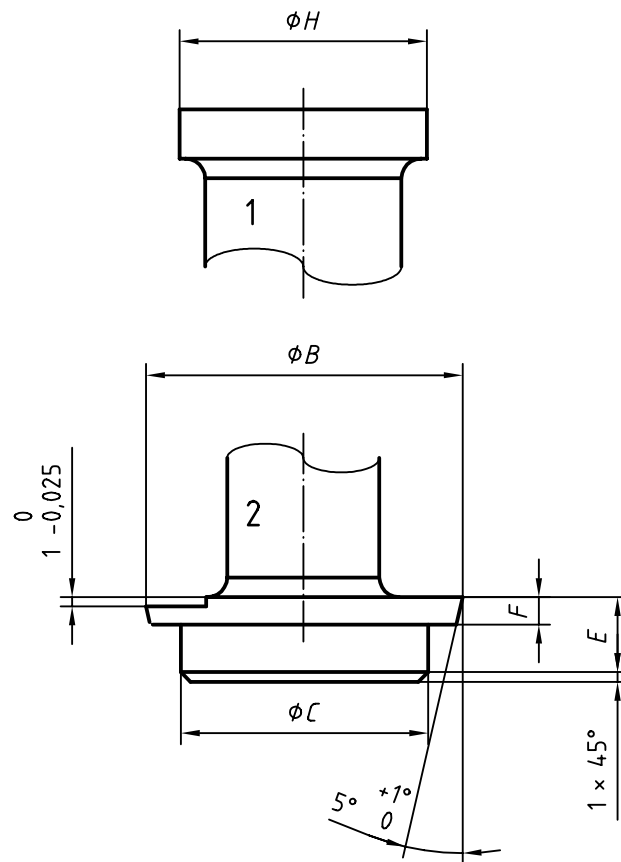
Recess diameter plug gauge (gauge No. 2)
